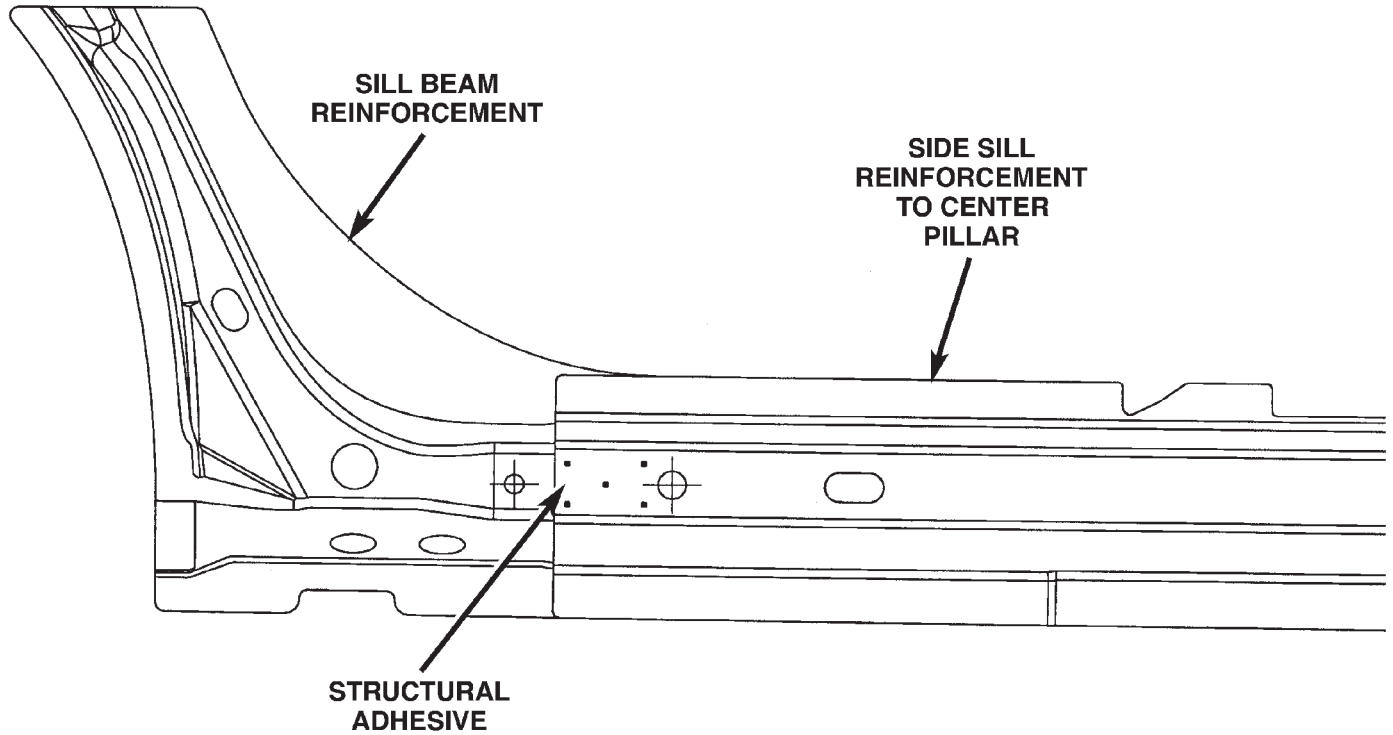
SIDE SILL REINFORCEMENT TO CENTER PILLAR
